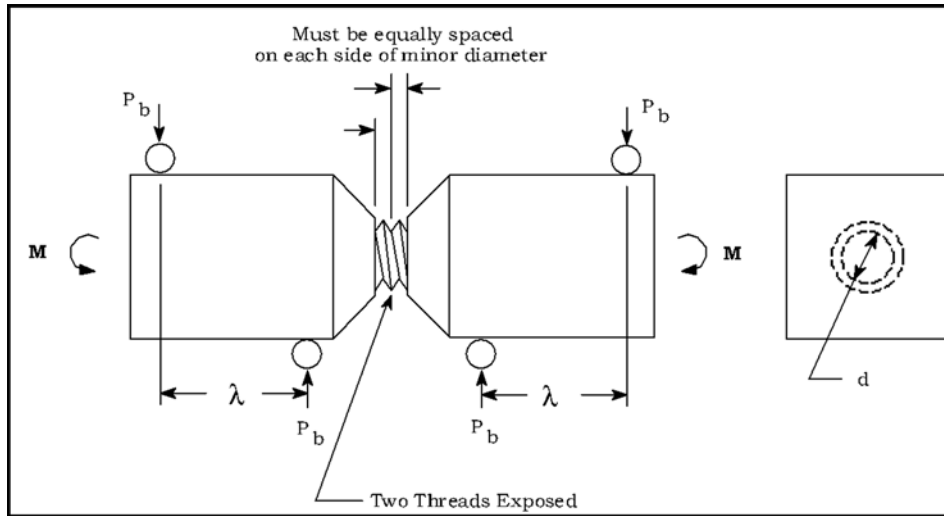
Four-Point Bend Loading of Fasteners. Maximum Tensile Stress, $\sigma_t = 32P_b\lambda/Id^3$
